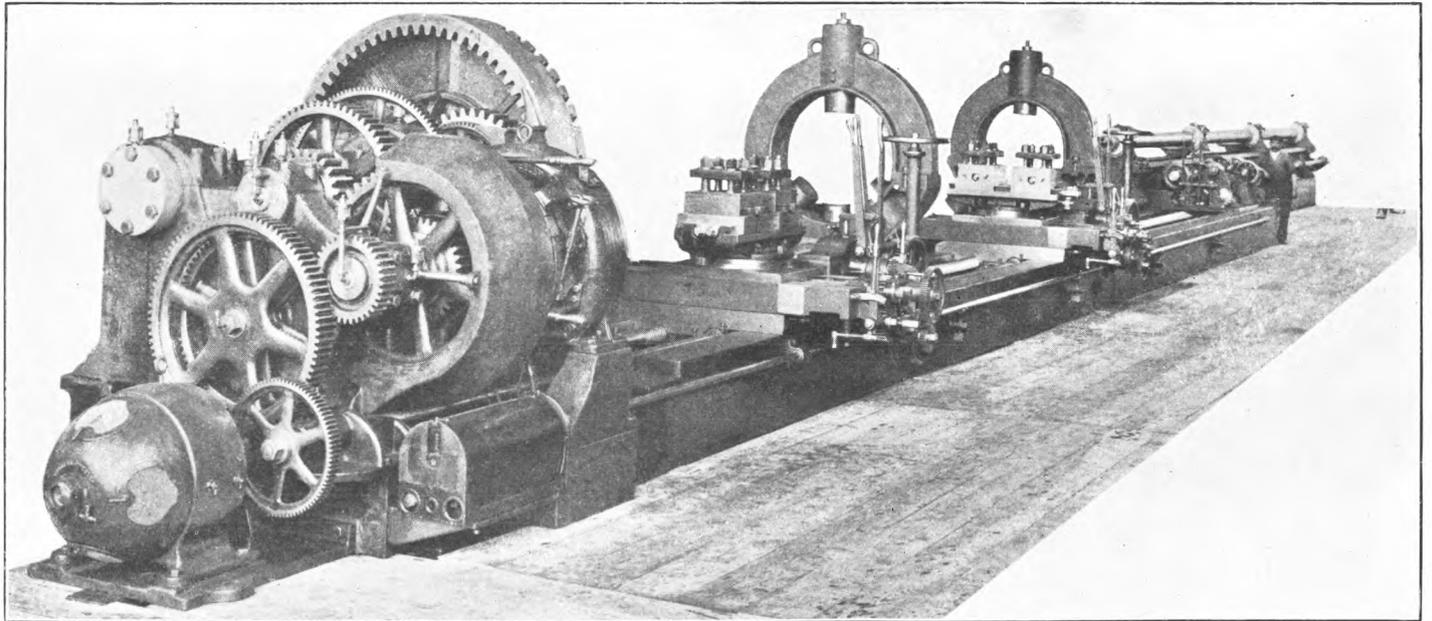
LARGE GUN LATHE, WITH UNGUARDED GEARS.
